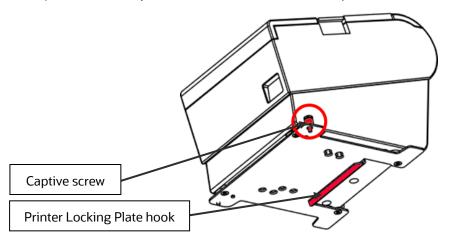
Location of the Printer Locking Plate hook and captive screw.
